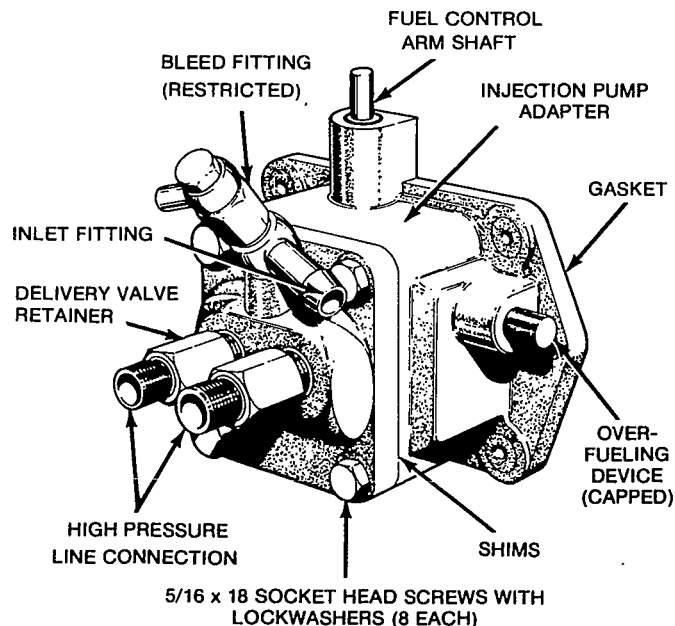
BRYCE/KIKI PUMP AND ADAPTER ASSEMBLY
